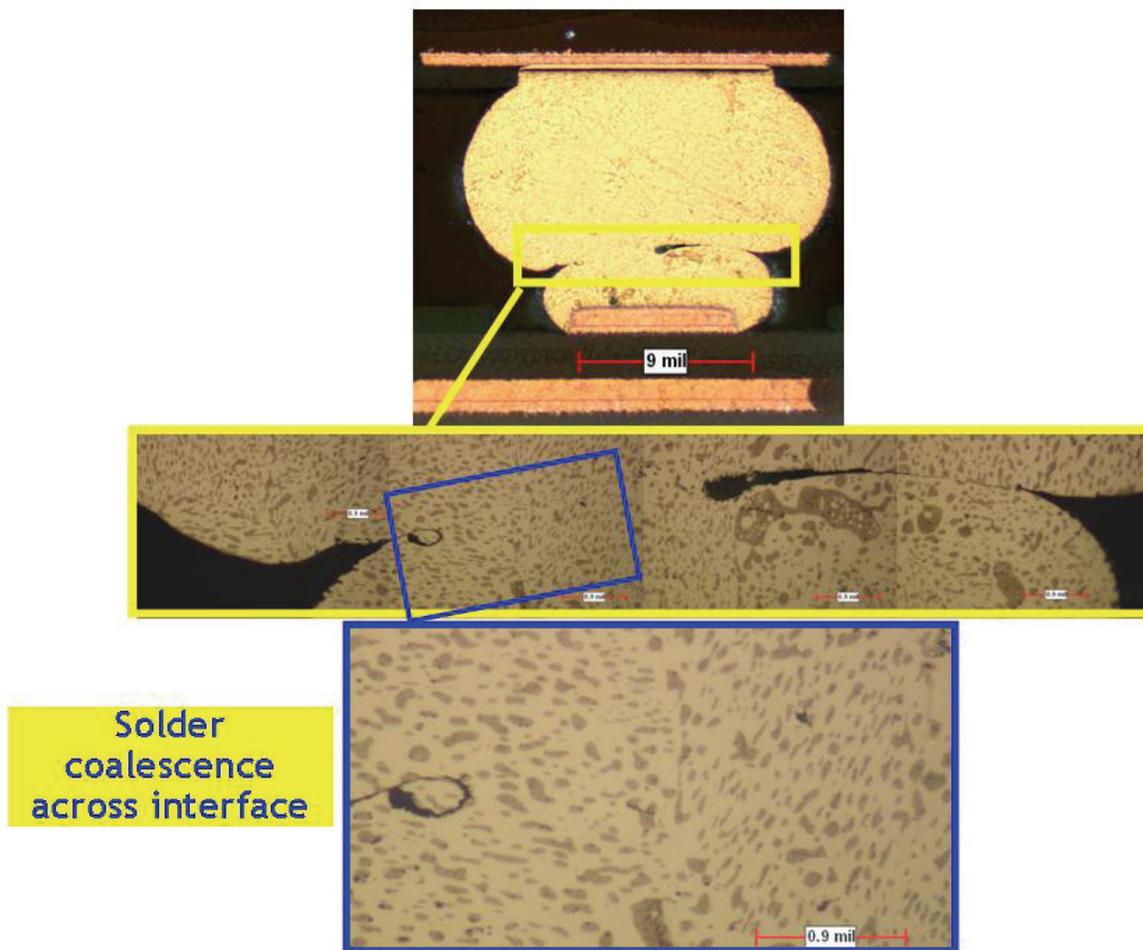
A series of photomicrographs of a HnP defect in the 484 I/O PBGA that will pass all routine factory testing. The ball and paste in this solder joint are connected across about 30-40% of the area of a normal, well-formed solder. The risk of failure of this latent defect cannot be quantified.
